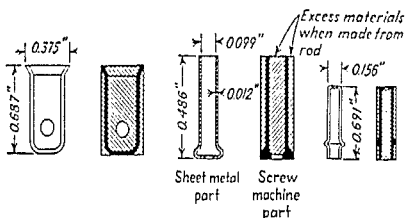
Typical screw-machine parts and a similar part produced on the eyelet machine.
